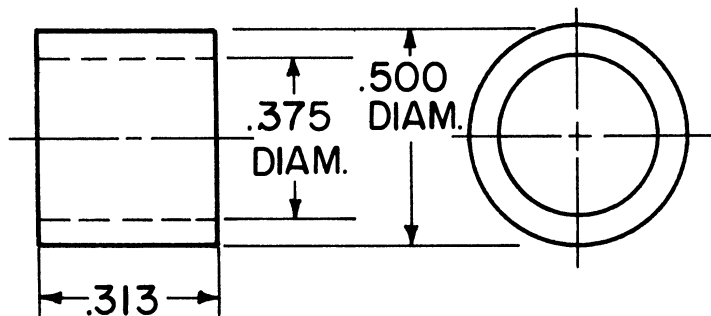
Details—male elements of the cylindrical crimped type ends used on the W-4 and W-3I BFA's. Drawing not to scale.
